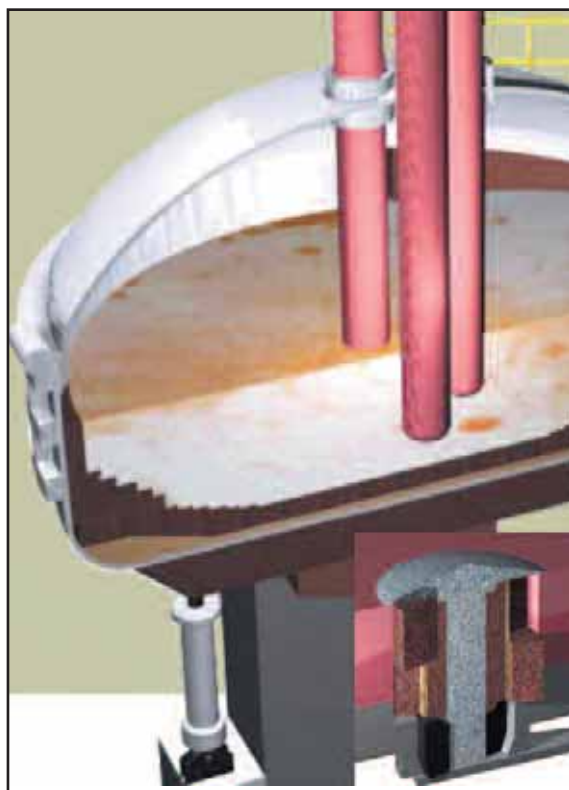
Schematic of Eccentric Bottom Tapping Electric Steelmaking furnace with EBT tap hole filler aggregates.
